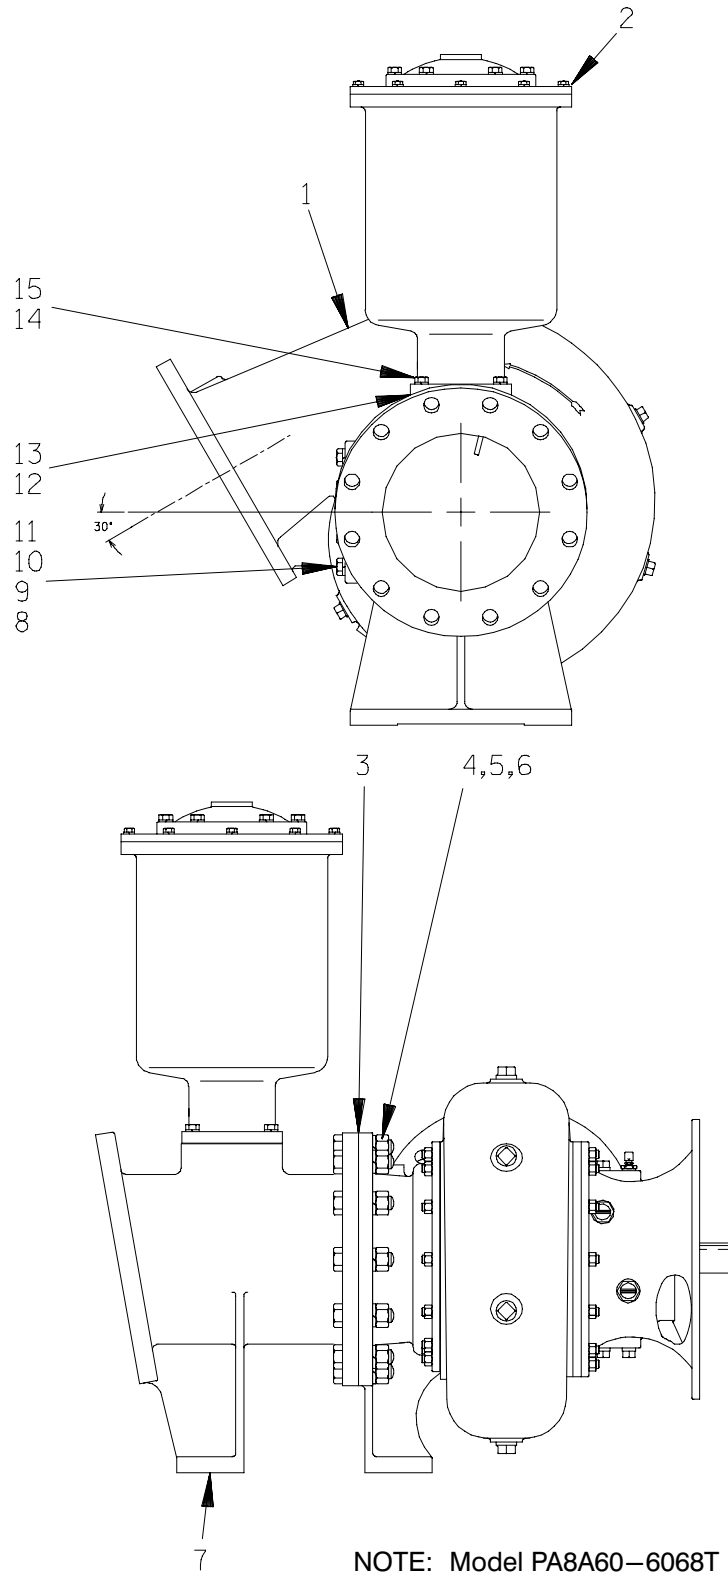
PA10A60-(3/11.5) SU And PA10A60-(SAE 2/11.5) Pump Model Assemblies
